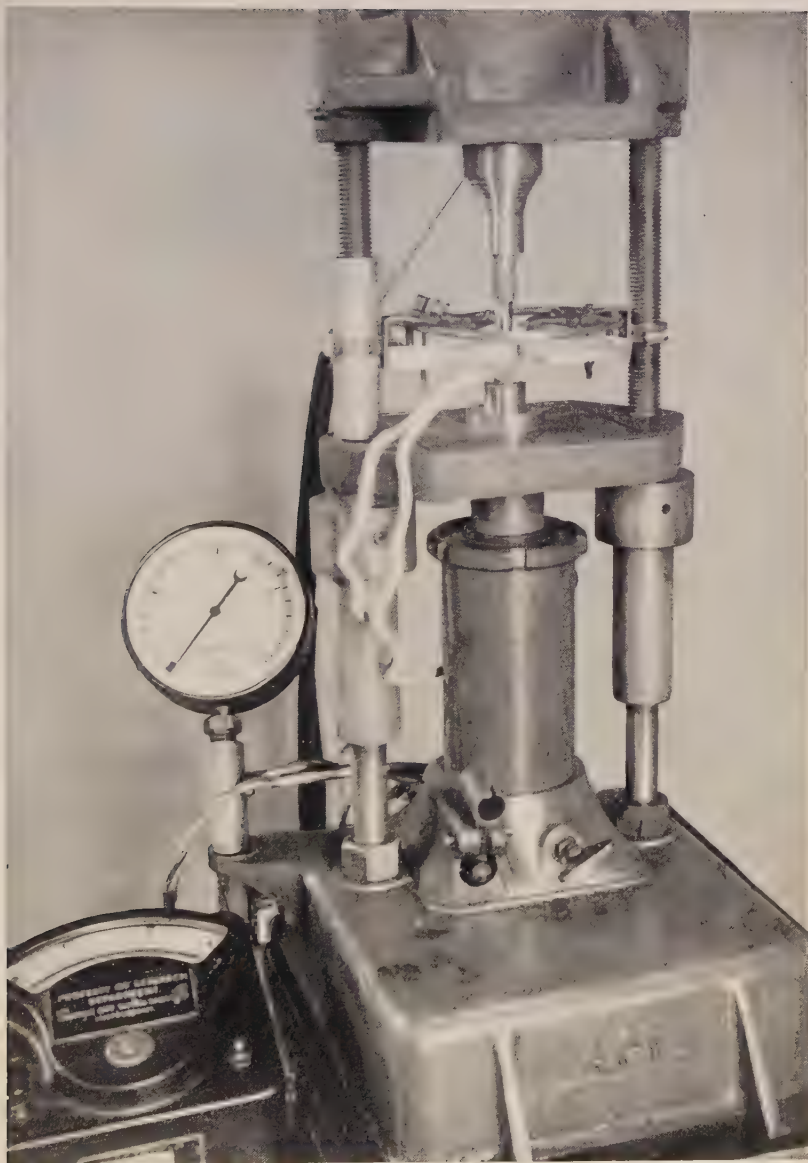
General Arrangement of Equipment for Pressure Welding.
